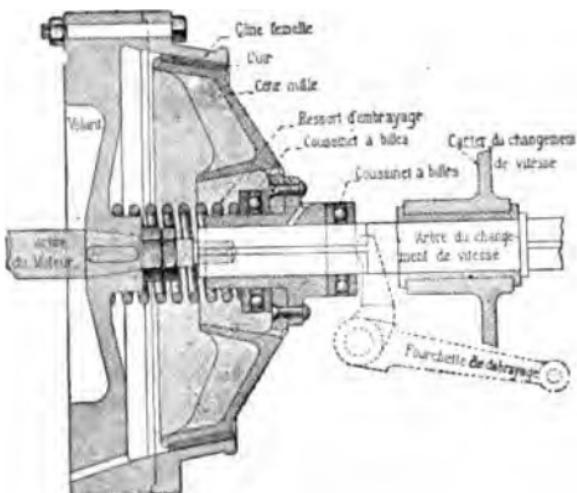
THE CLUTCH—GLADIATOR LIGHT MOTOR CARRIAGE
